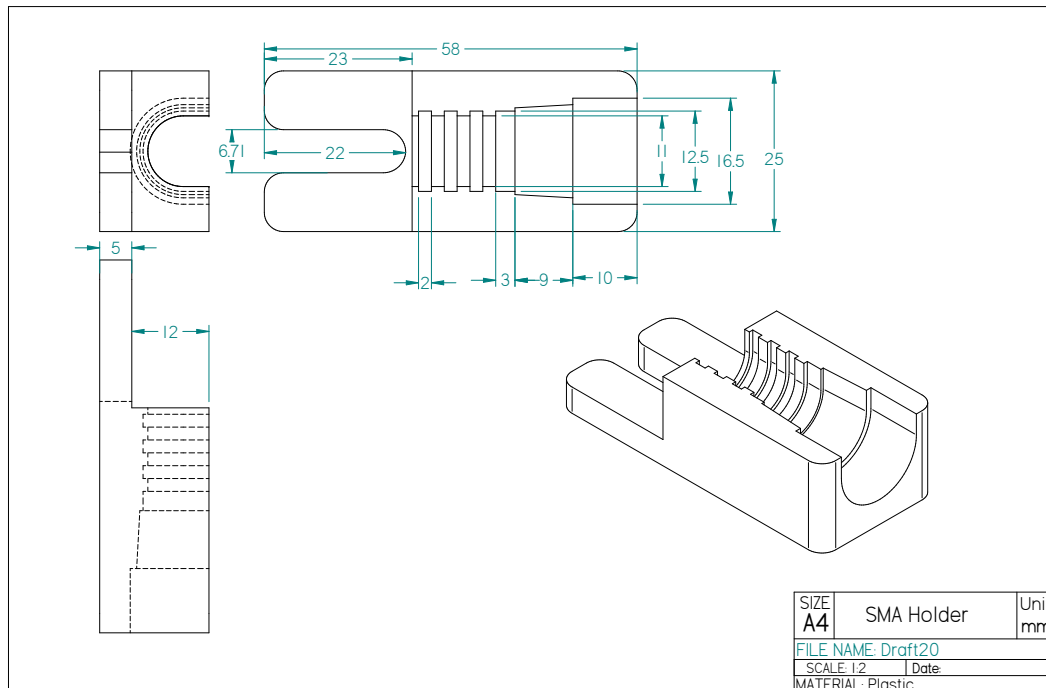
Drawings of 58 mm SMA cable holders. All the dimensions are in millimeters.
